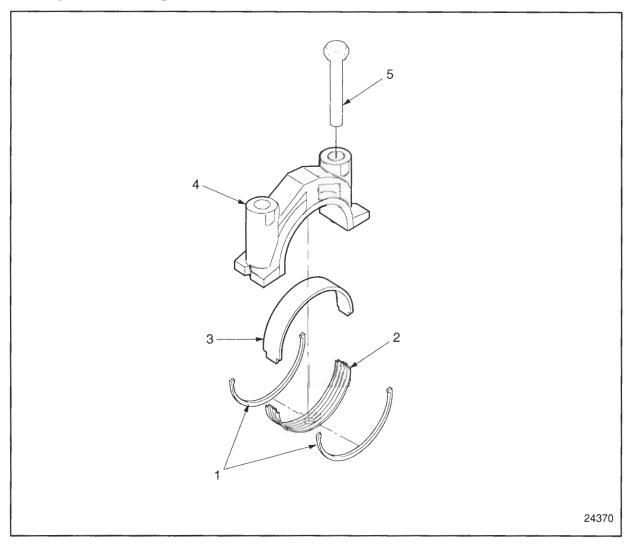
Main Bearings Caps, Bearing Shells and Crankshaft Thrust Washers
